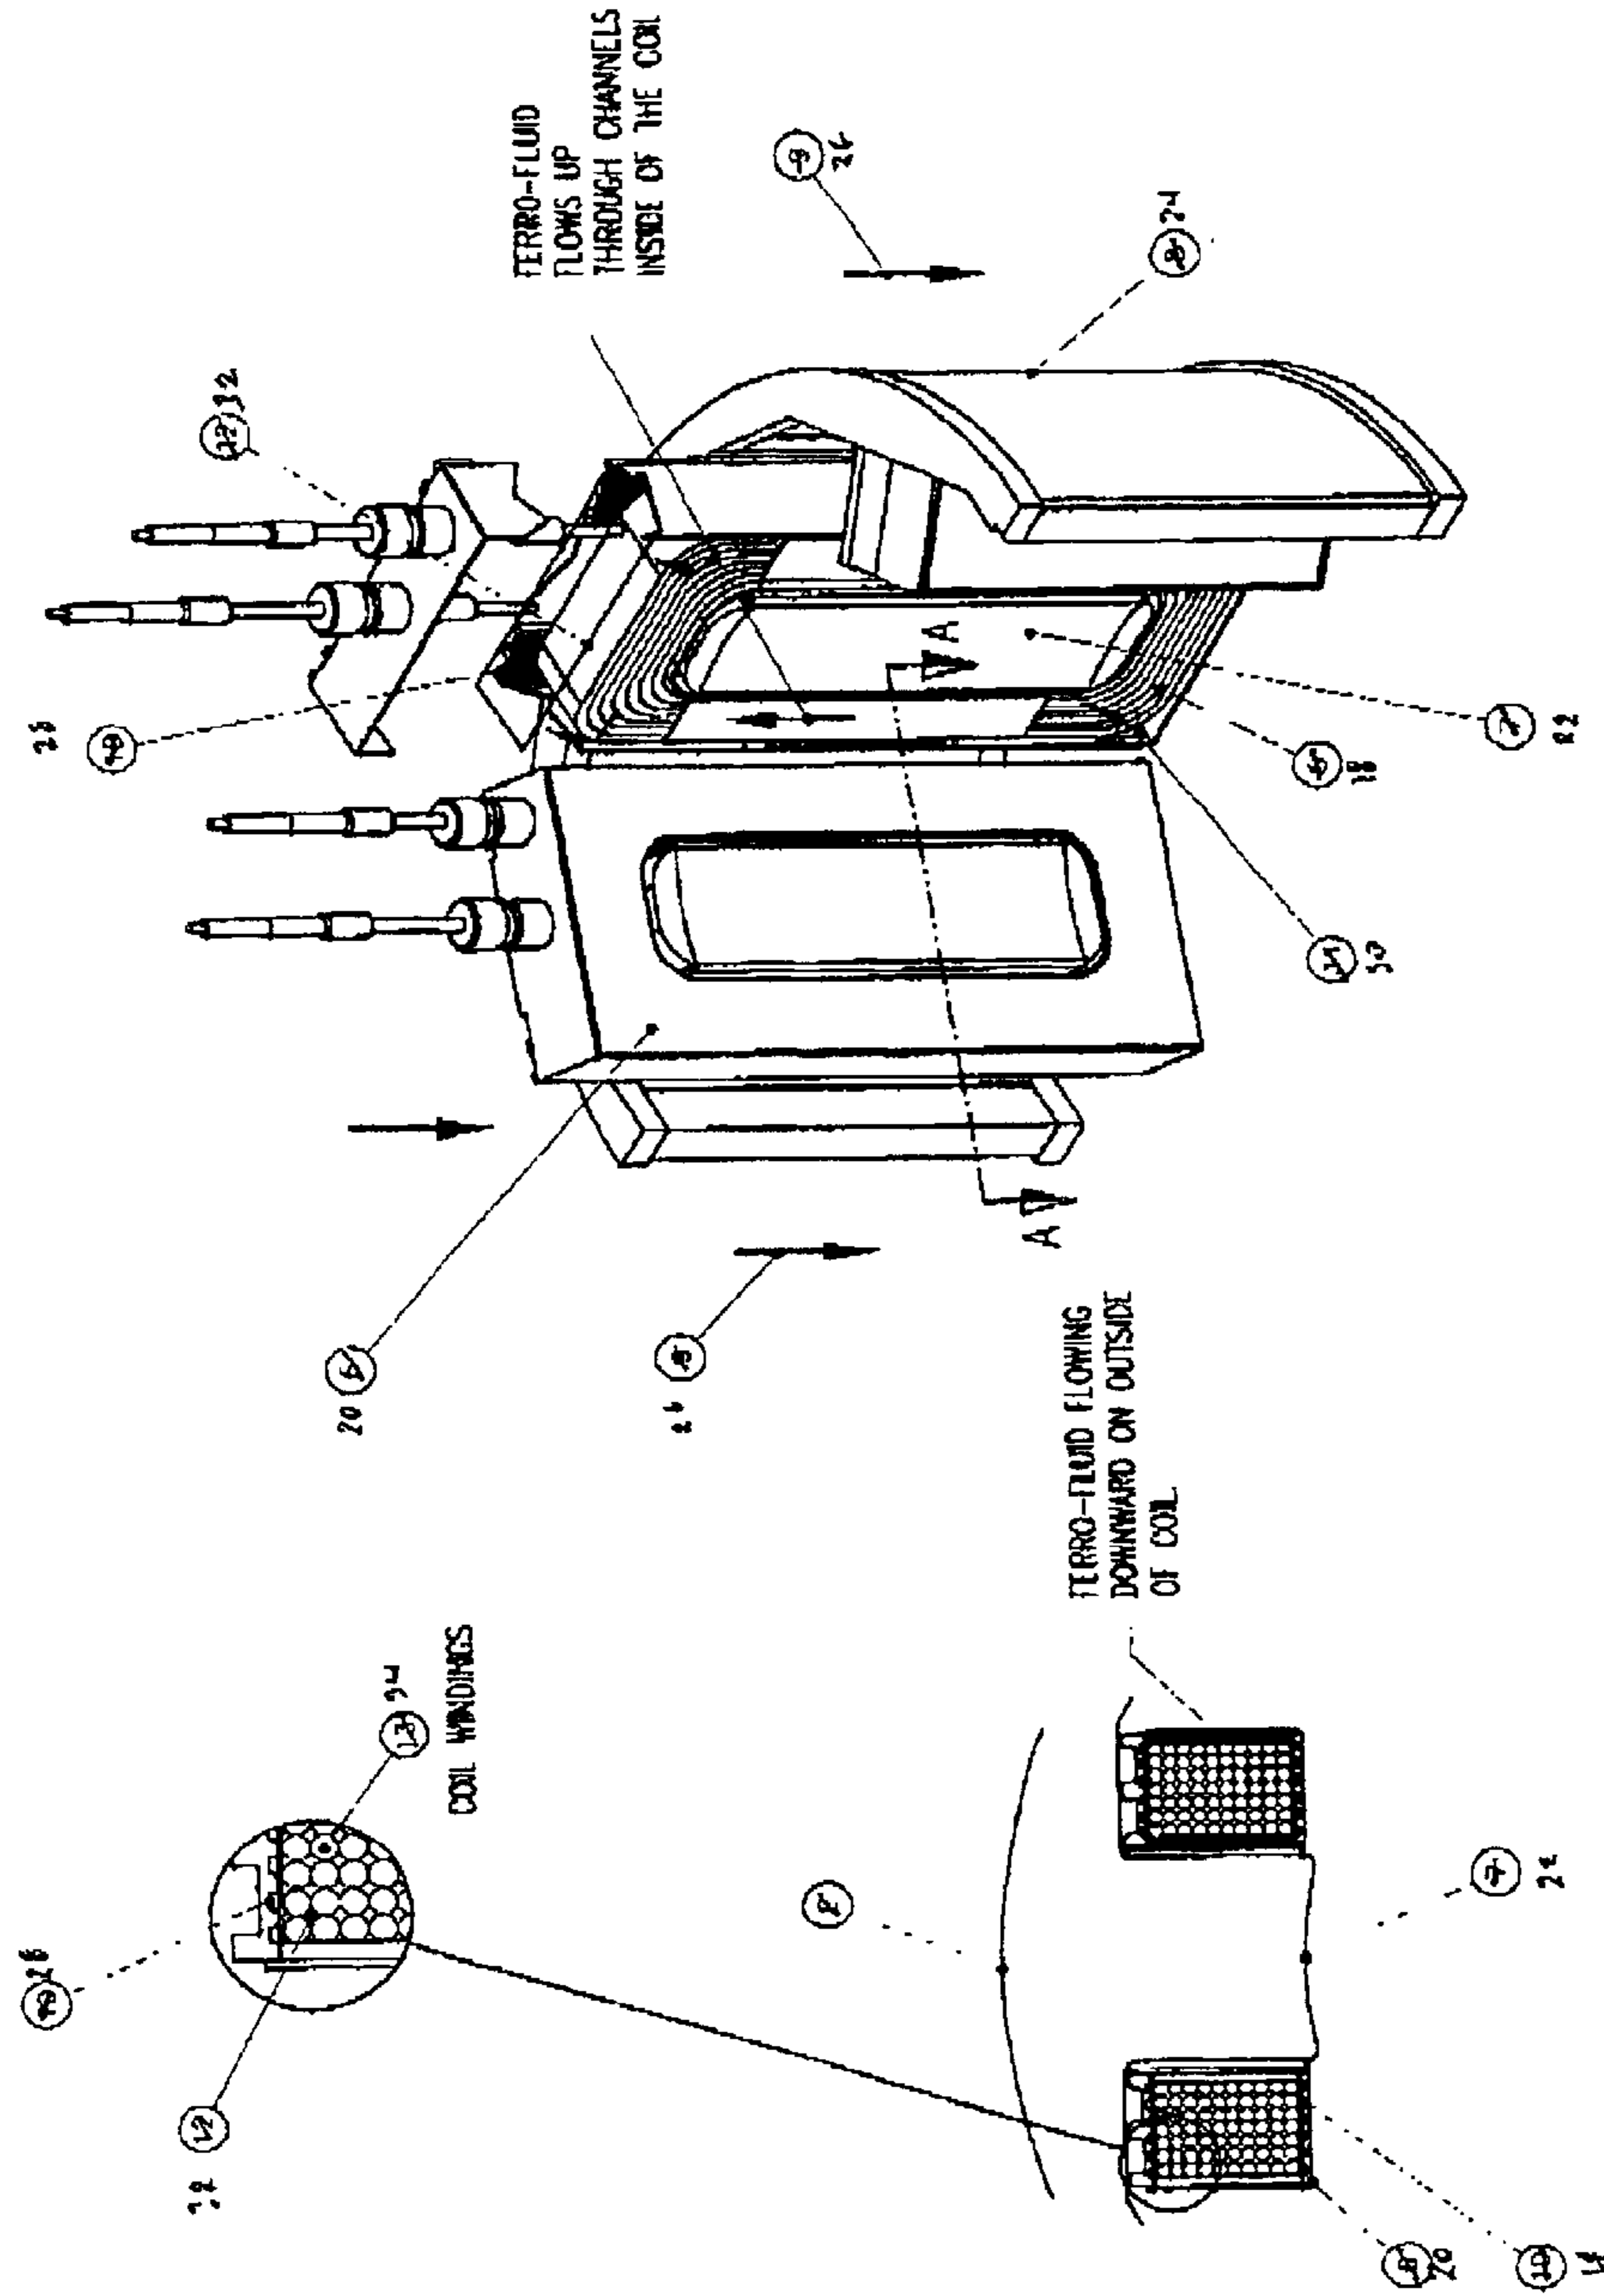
SECTIONAL VIEW OF THE EMS ASSEMBLY WITH WINDINGS COOLED BY FERROFLUID
